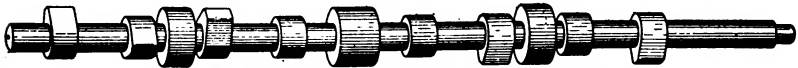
Cams Integral with Shaft—Milling Machine Job
